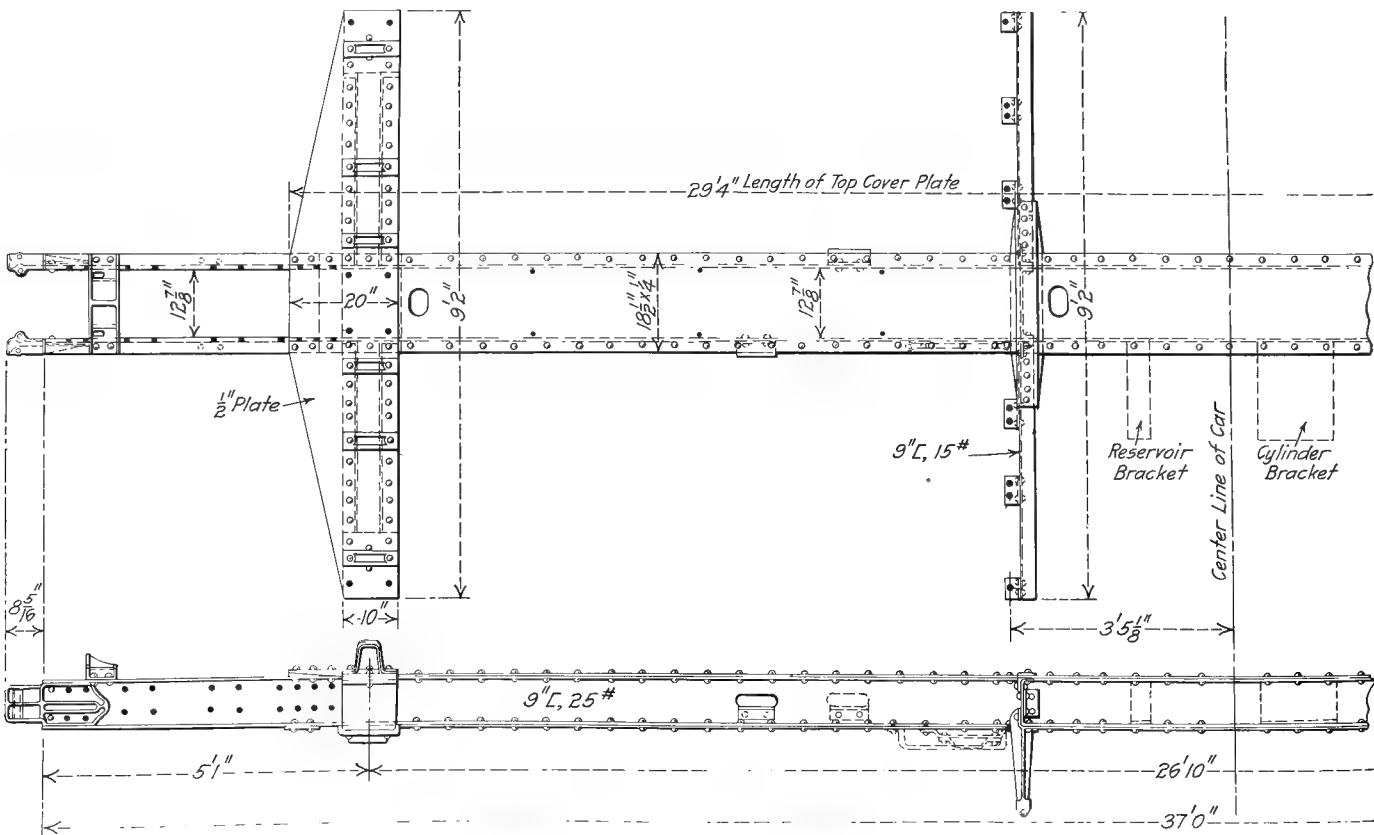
Steel Underframe Used on the New York Central in Strengthening Wooden Box Cars.
